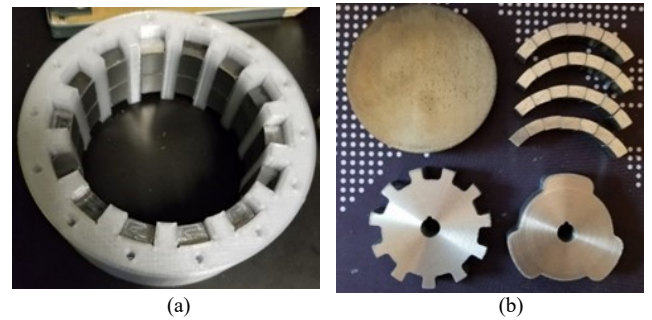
(a) The 3D printed modulator cage with the modulator pieces inserted and (b) a raw Somaloy puck (top left), the 28 “half” modulators (top right), Rotor 3 (bottom left), and Rotor 1 (bottom right).
